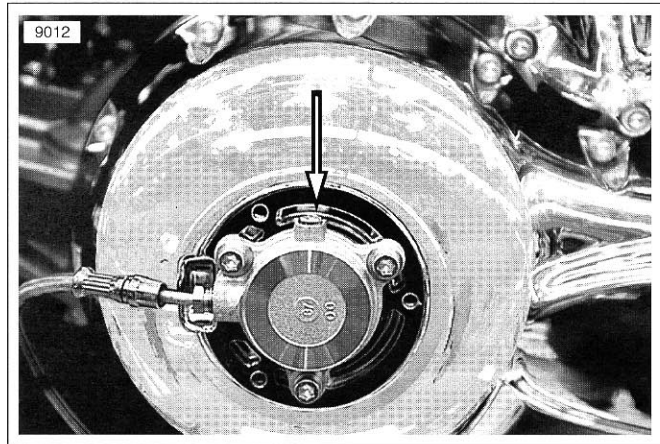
Secondary Clutch Actuator Bleed Screw
